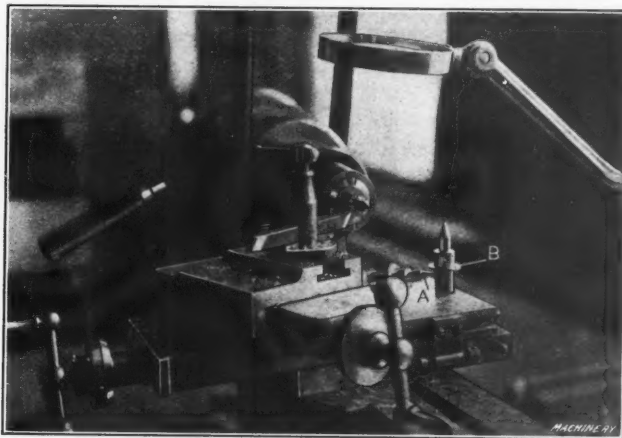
Closer View showing a Rough and Finished Valve Needle Point
